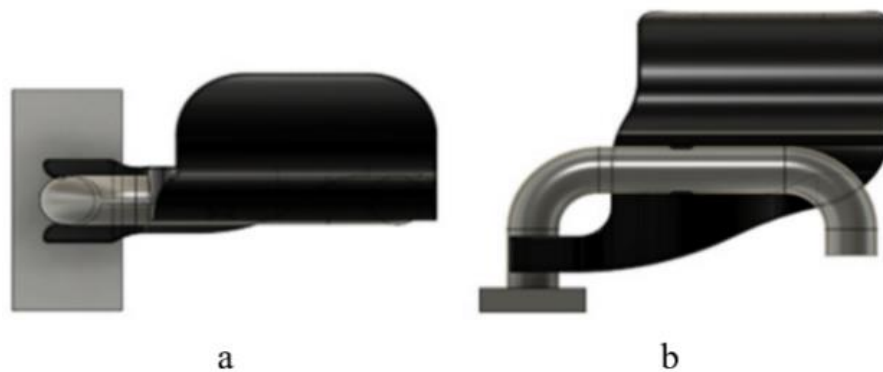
Hand-free handle attachment: a) front view; b) bottom view in which mounting method could be seen [5]
